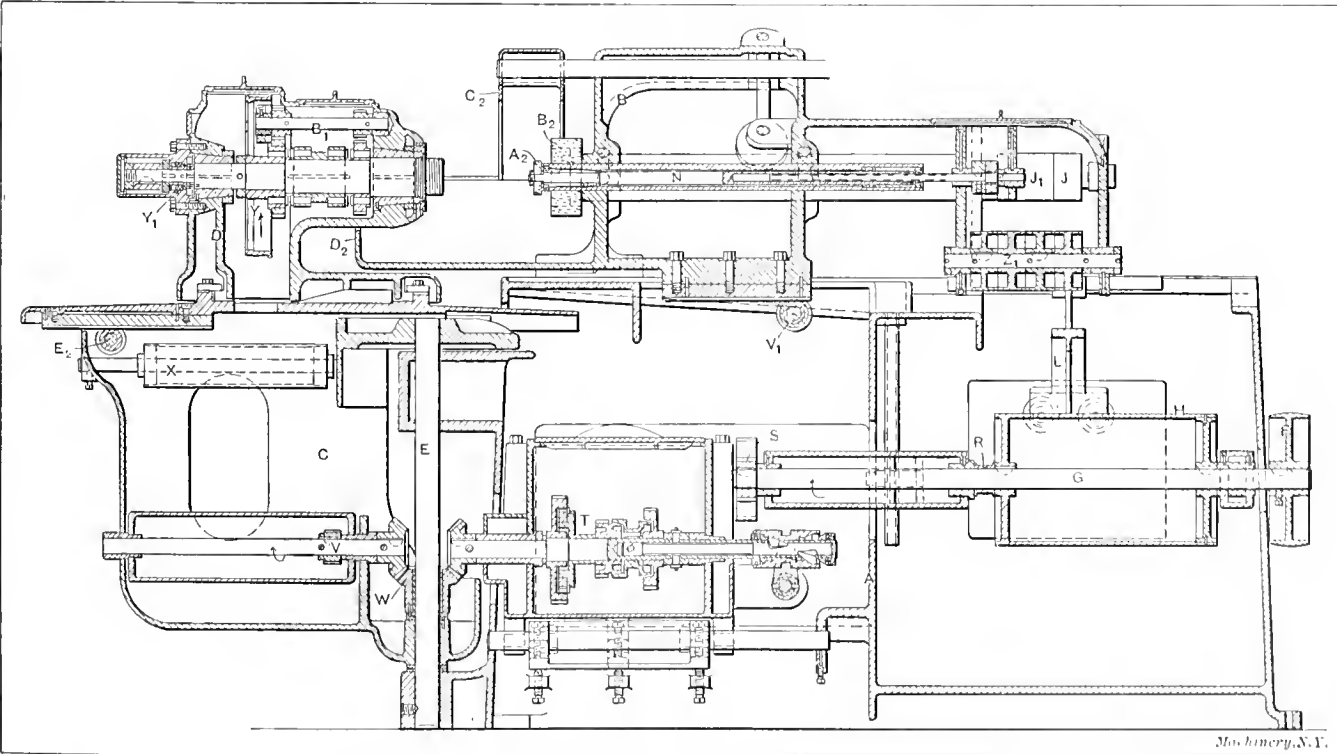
Longitudinal Section, showing Work and Wheel-driving Mechanism, and General Structure of the Machine
